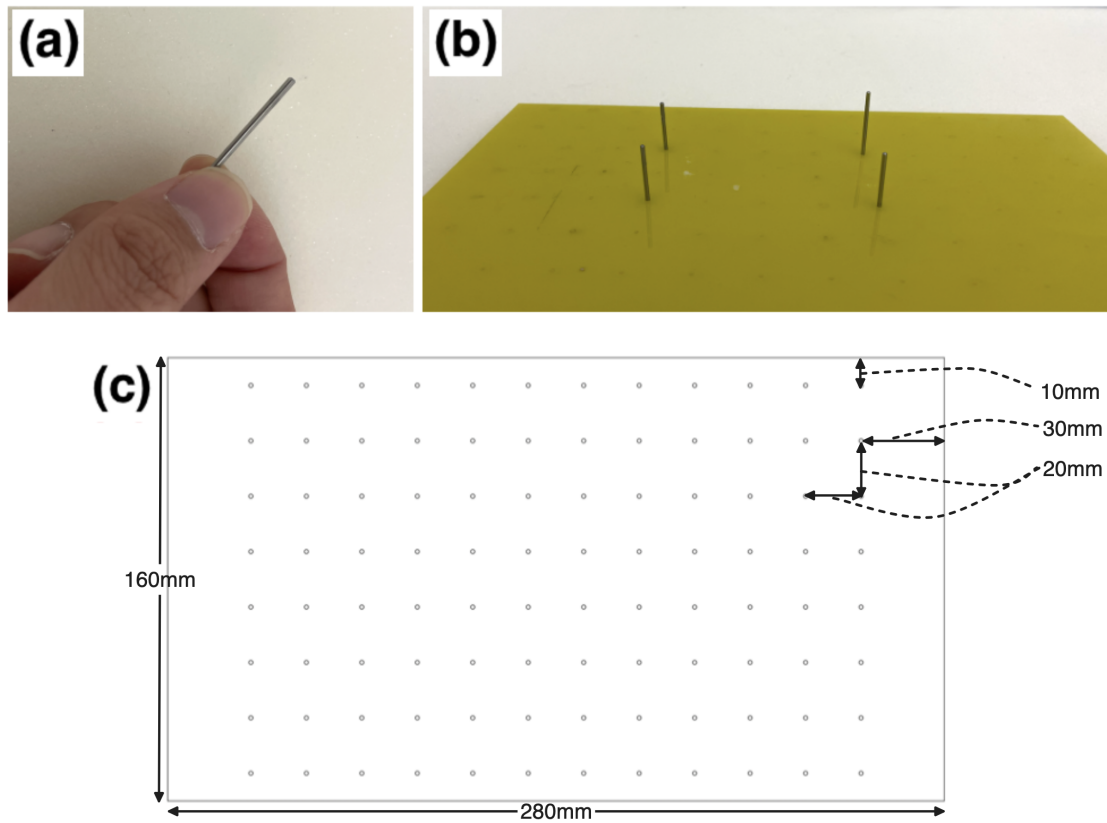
Materials required for lamination preparation: (a) Dowel pin for lamination. (b) Dowel pins inserted through the acrylic board. (c) Top view of the acrylic board with measurements and hole placement.
